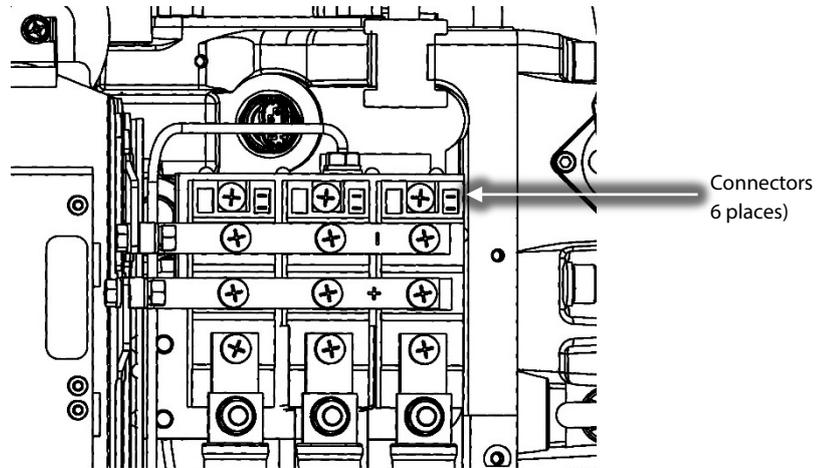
Soft Start SCR Gate Cable Harness Removal
